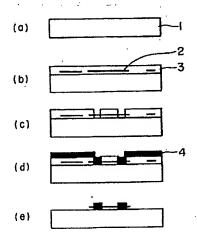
A cross sectional view to explain the process showing an embodiment of the present invention.
